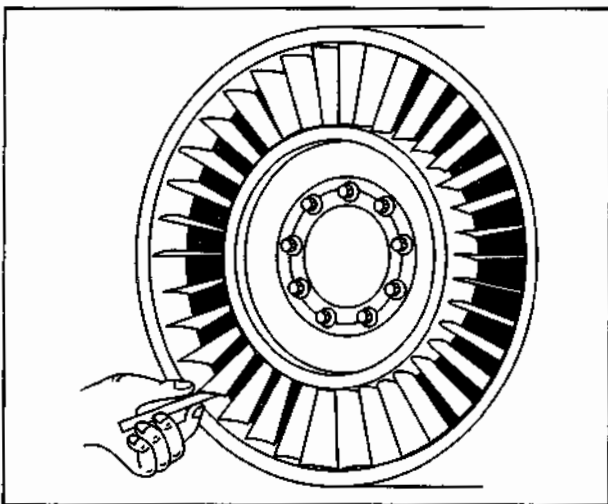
You can use a thickness gauge to check clearances between turbine blades and the shroud unless the manufacturer requires a special tool.
